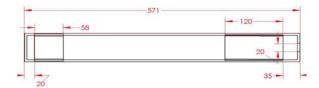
Front view of pipe connecting the fuel hopper with gasifier assembly (All dimensions in mm).
